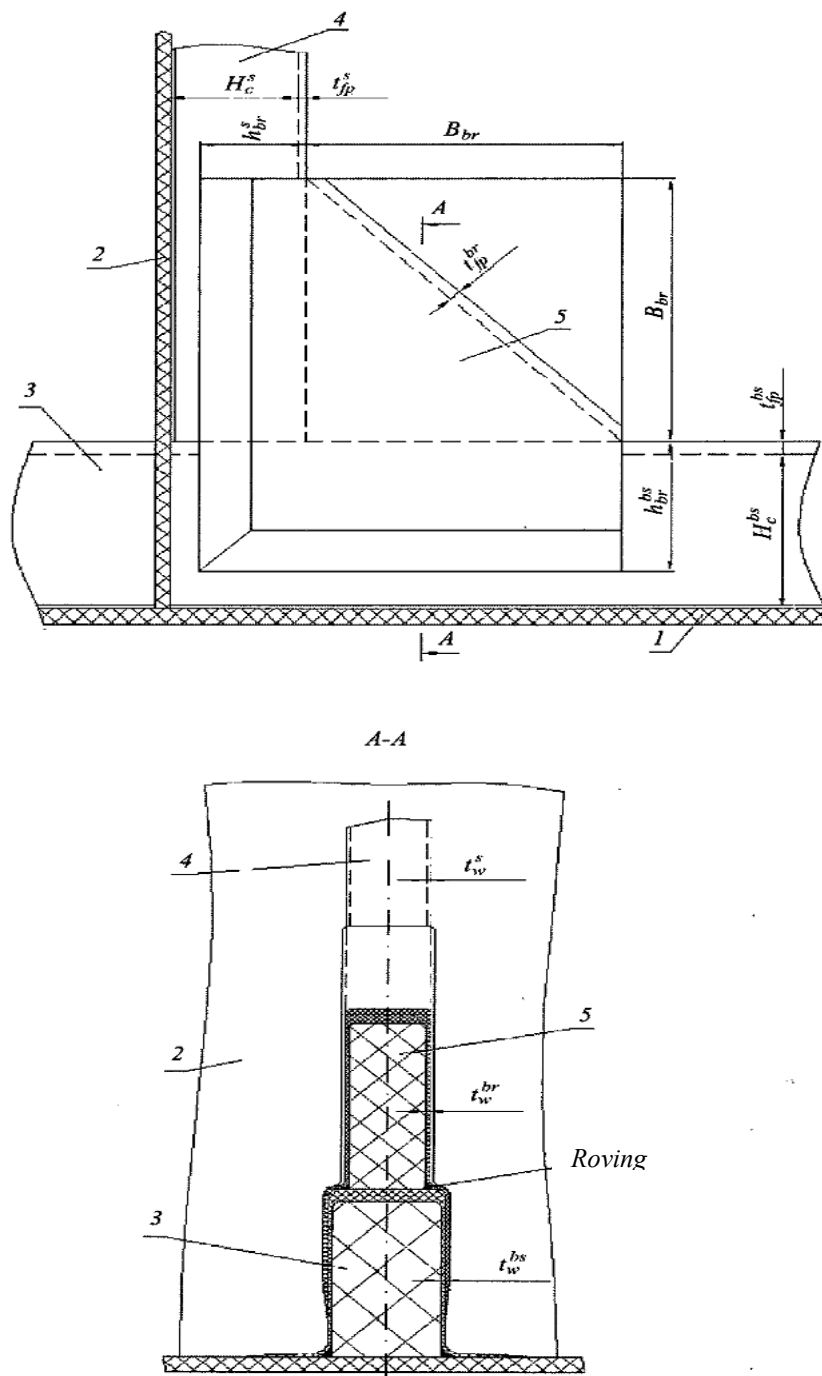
Joint of the bulkhead stiffener and longitudinal (stringer, deck girder):
